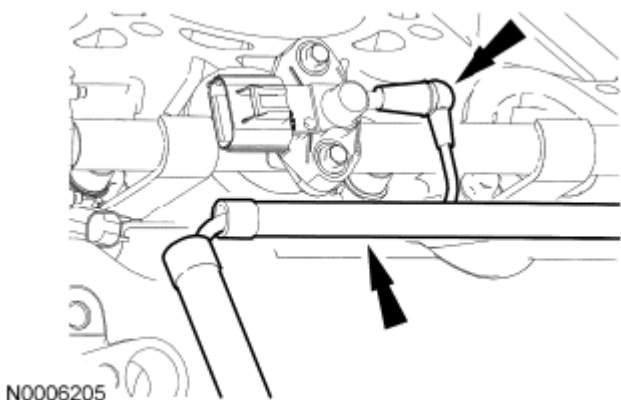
Locating Fuel Pressure And Temperature Sensor Vacuum Hose Fittings
